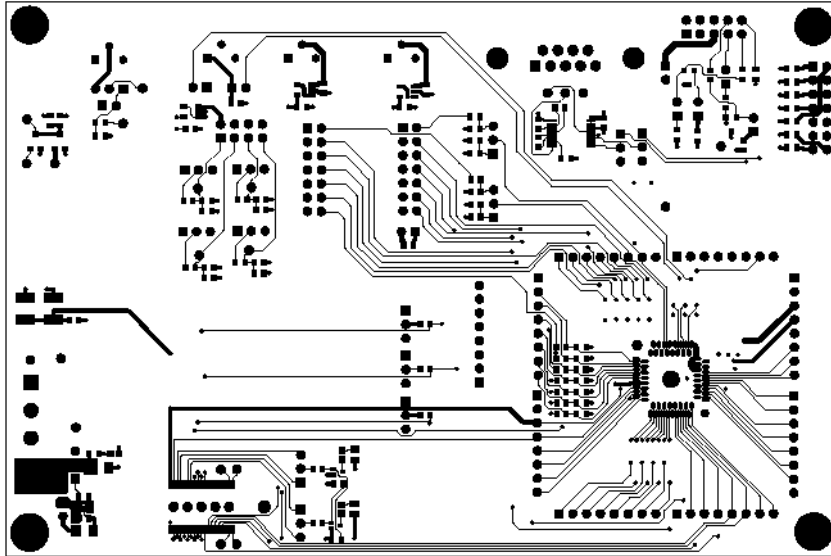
UCD3138OL64EVM-031 Top Copper (top view)
